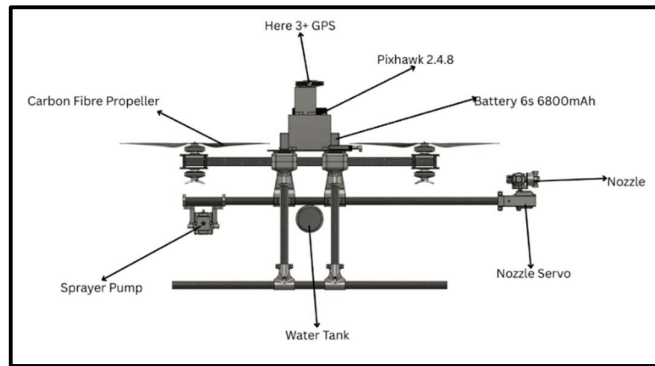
Image showing the left side view of the CAD model showing the different parts of the drone
